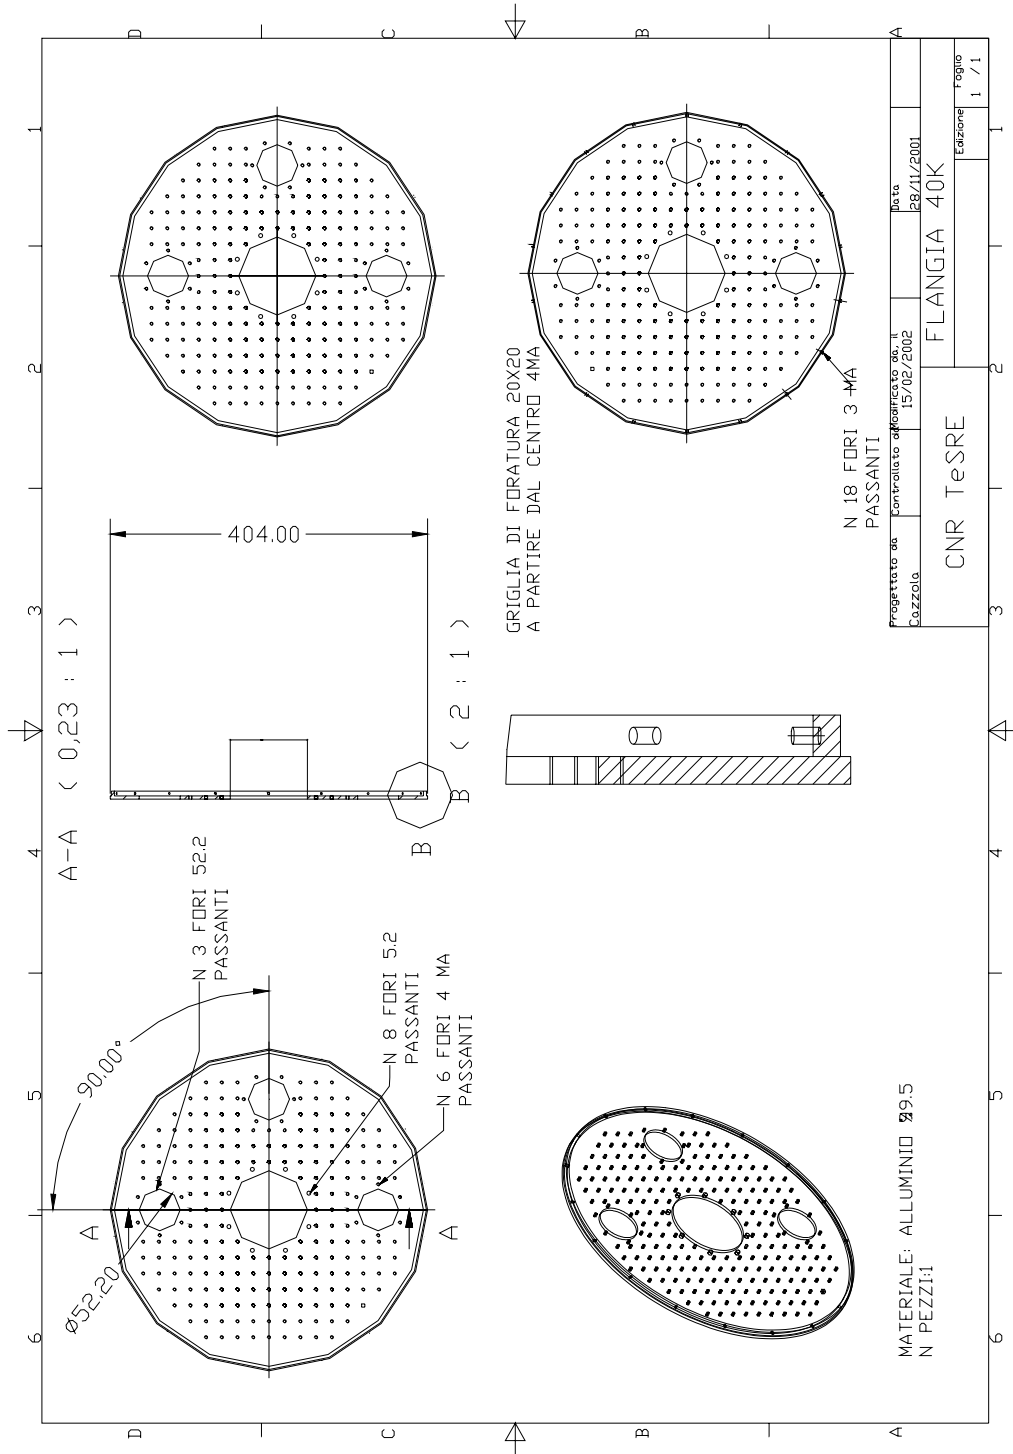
Drawing of the 40K flange made of aluminum 99.5%
